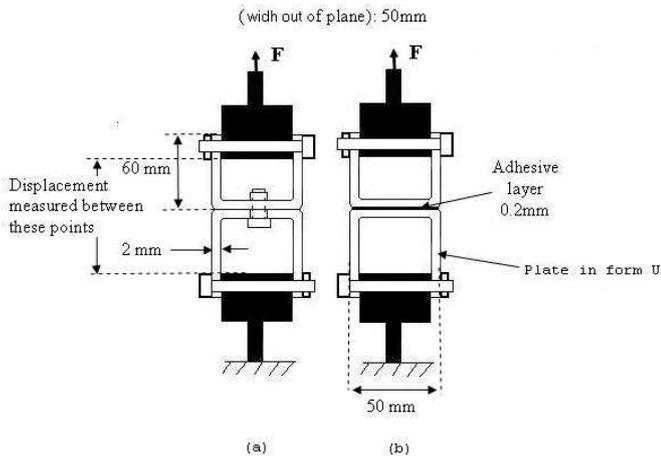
Tension configuration (a): screwed or riveted joint, (b): bonded joint
